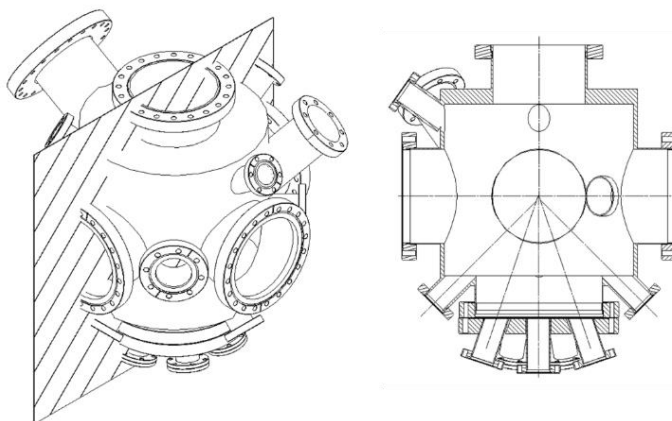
CAD image and cross-sectional technical drawing of growth chamber
